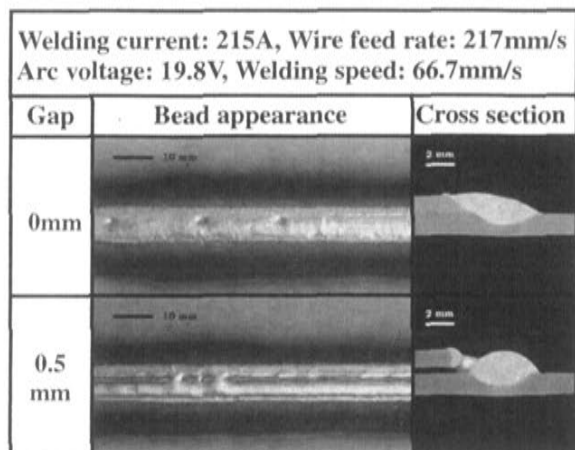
DC pulsed MIG welding at a speed of 66.7 mm/s
